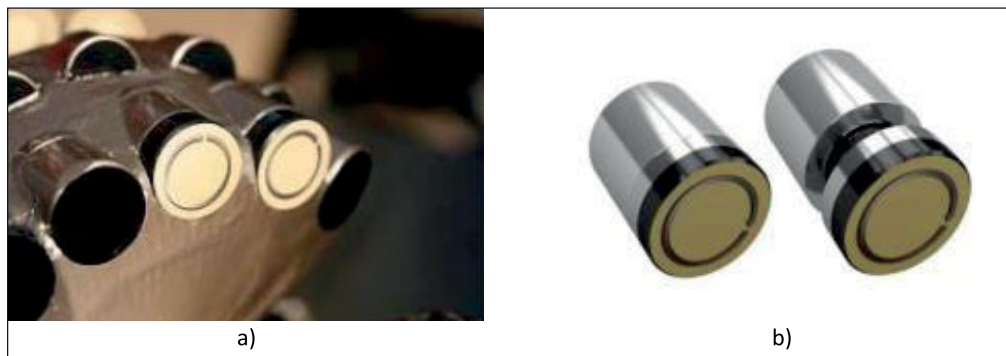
Drill bits with rotary cutters ONYX 360: a) the ONYX 360 cutter shaft is fully integrated into the housing to ensure the retention and rotation of the cutters during drilling; b) ONYX 360 cutters before installation in the drill bit: assembled (left) and disassembled (right) (Neskoromnykh et al., 2020)
